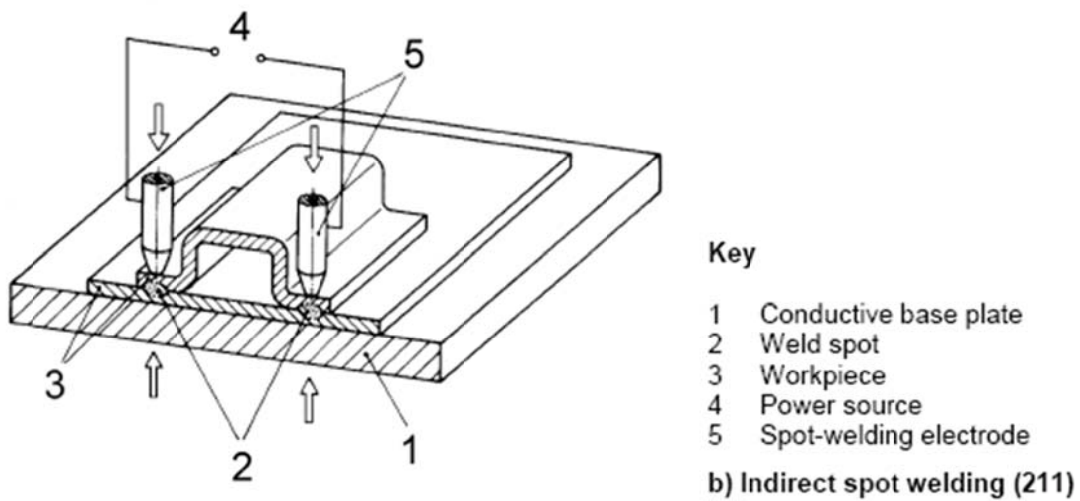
'Indirect' spot welding (ISO 669)
